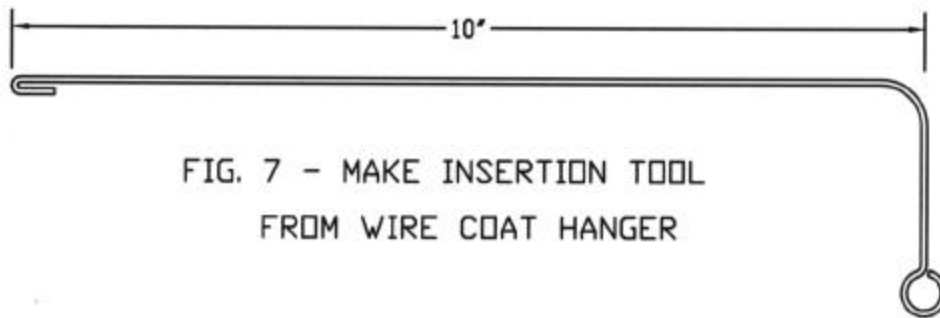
MAKE INSERTION TOOL FROM WIRE COAT HANGER
